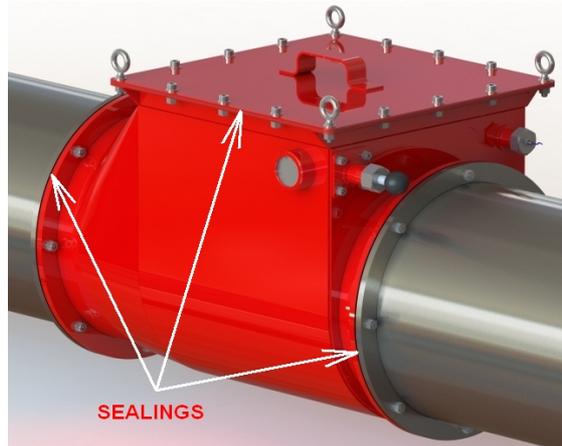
B-FLAP in the pipe – flange and lid gaskets
